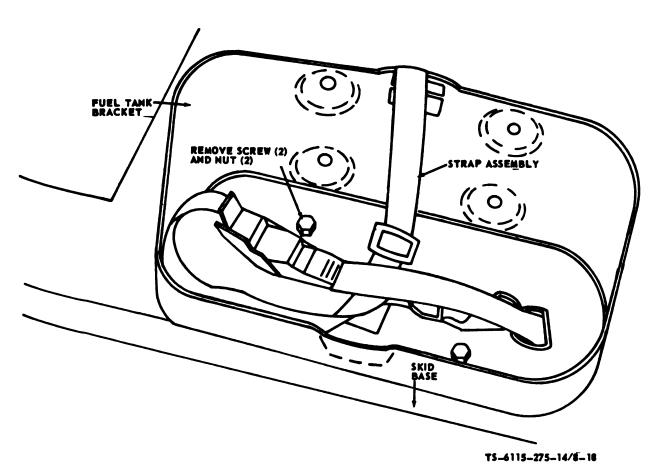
Fuel tank bracket and strap assemblies, removal and installation (Model MEP-018A).
